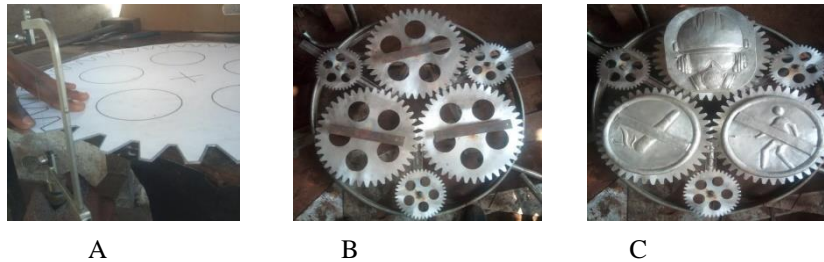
Assemblage of gear concept after welding (A-C)
